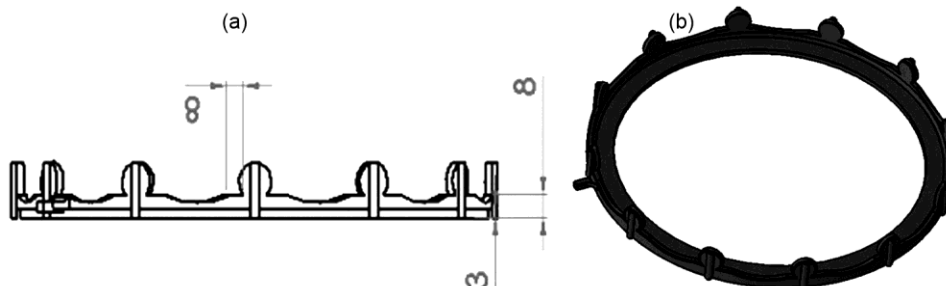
CAD of Orifice coversfor seed chambers (a) side view, and (b) isometric view of seed orifice cover
